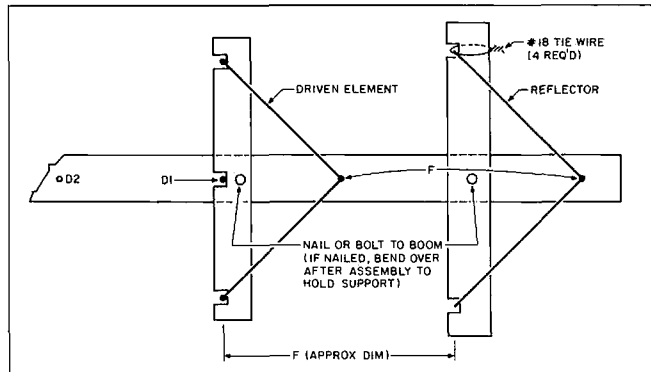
Top view of the driven element and the cross support assembled and attached to the boom.
